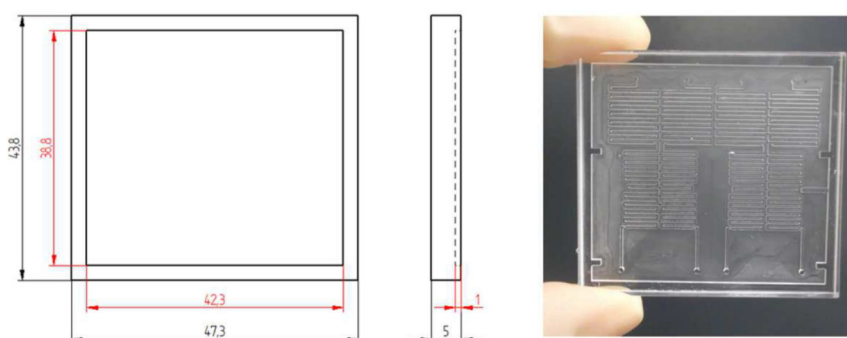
Left: Overall dimensions of the PMMA molds shown in black and the PDMS layers shown in red. Right: Example of a final PMMA mold.
